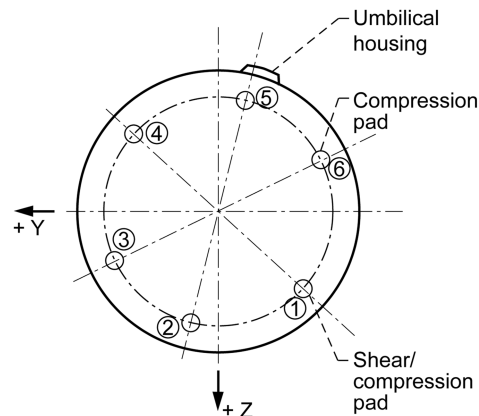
View of the Apollo command module aft heat shield showing compression pad locations (Fig. 9c in [25]).
